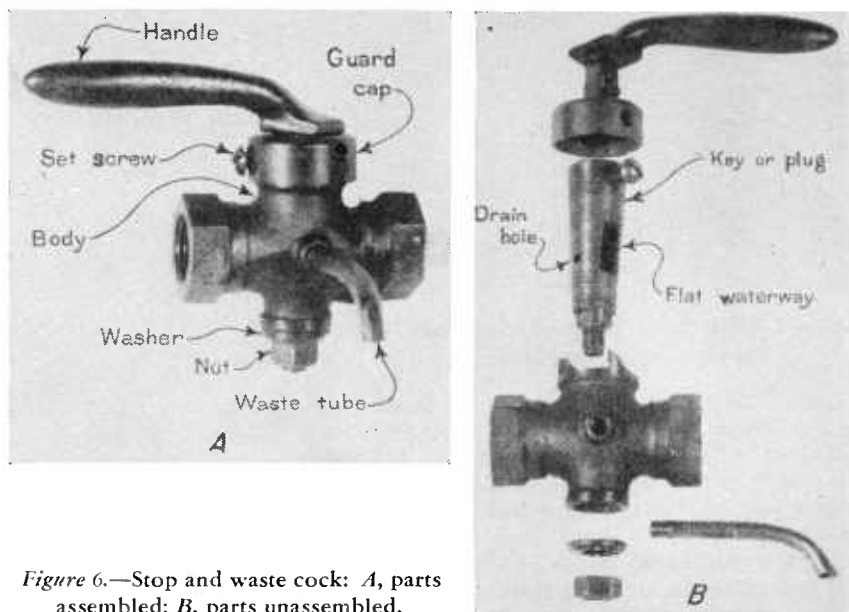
Stop and waste cock: *A*, parts assembled; *B*, parts unassembled.
